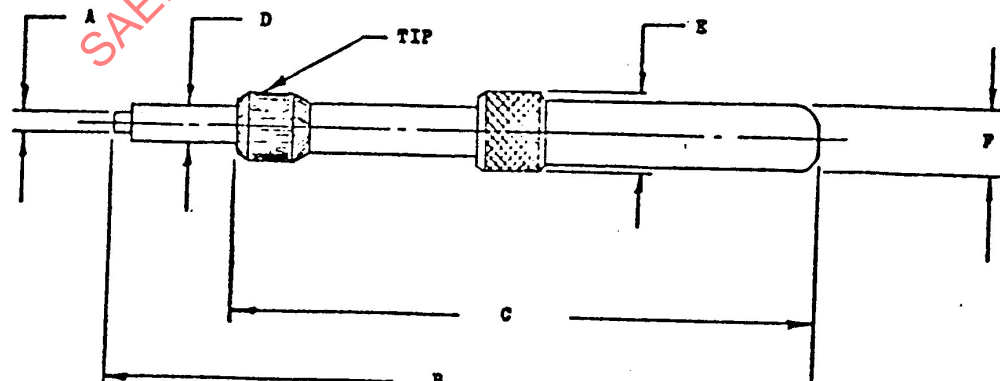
Type IV, Class 1, Style b, tang break-off tool for unified coarse and fine thread sizes 5/16 (0.3125) through 1/2 (0.500)
